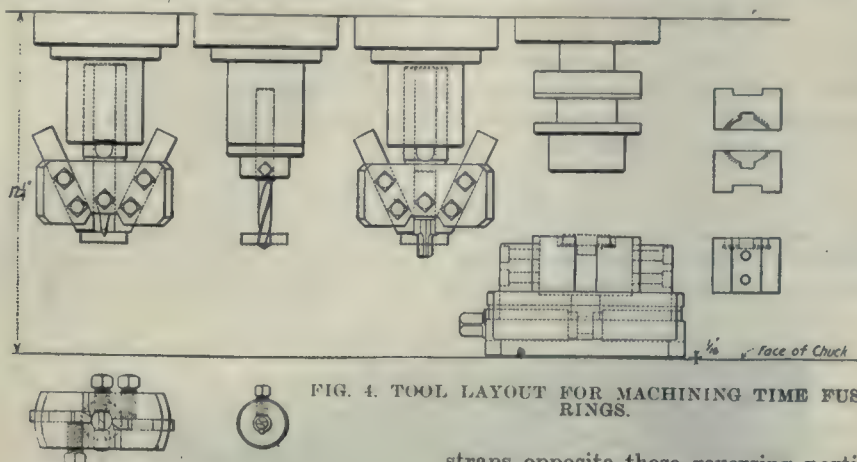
TOOL LAYOUT FOR MACHINING TIME FUSE RINGS.
